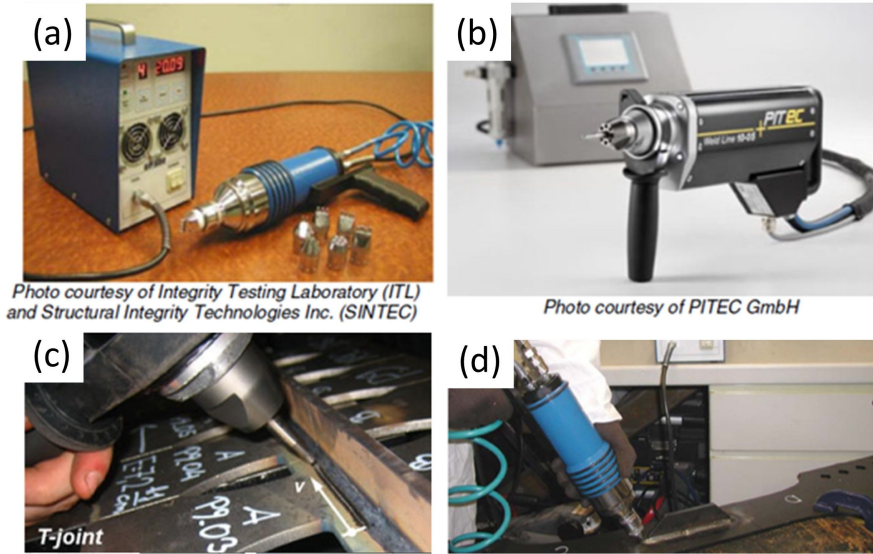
HFMI devices and application [87, 88, 89]: (a) ultrasonic device; (b) pneumatic device; (c) - (d) applications of hand-held HFMI in post-welding.
